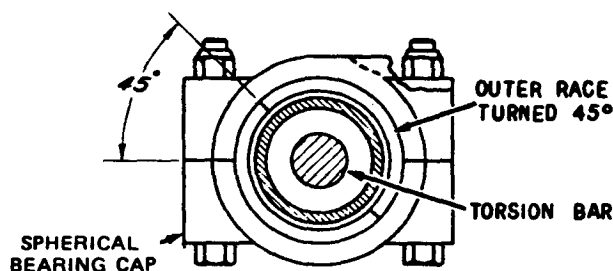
POSITIONING OF THE SPHERICAL BEARING OUTER RACE
